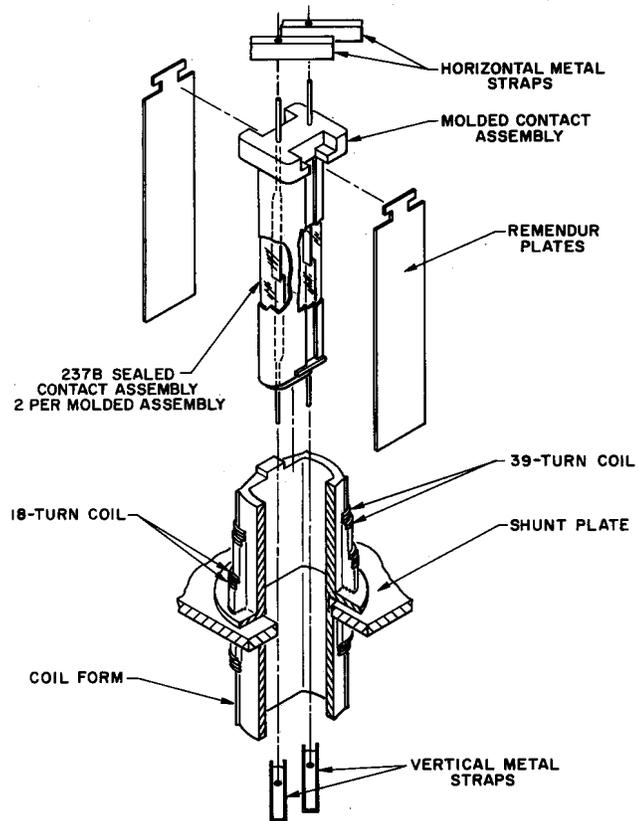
Exploded View of Ferreed Crosspoint (4.02)
